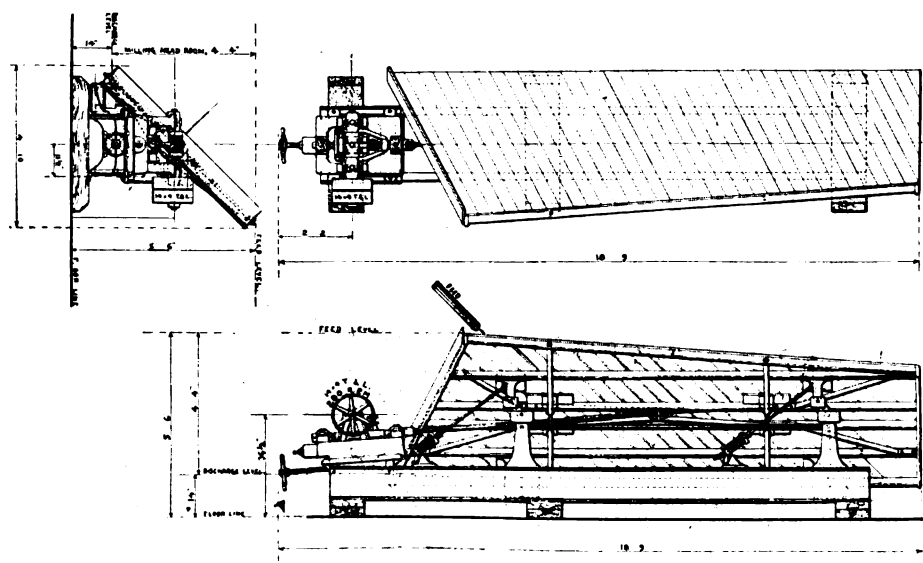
Showing Rear Elevation, Horizontal Plan and Cross-Section.
